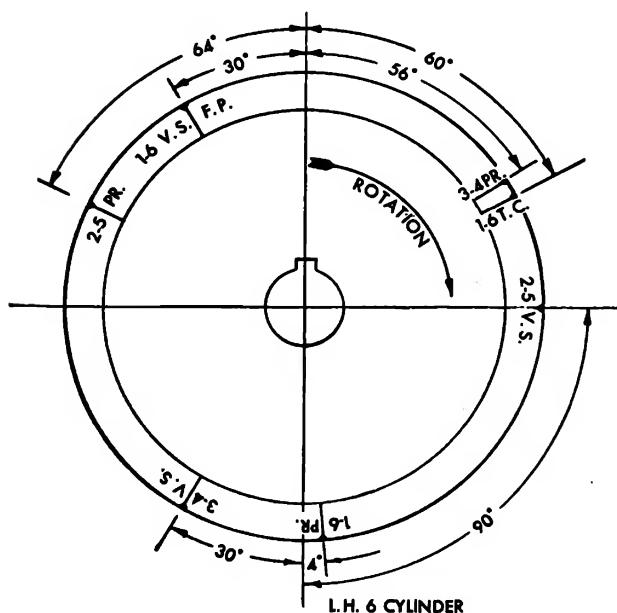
Timing marks on 6 cylinder left hand engine fan drive pulley
